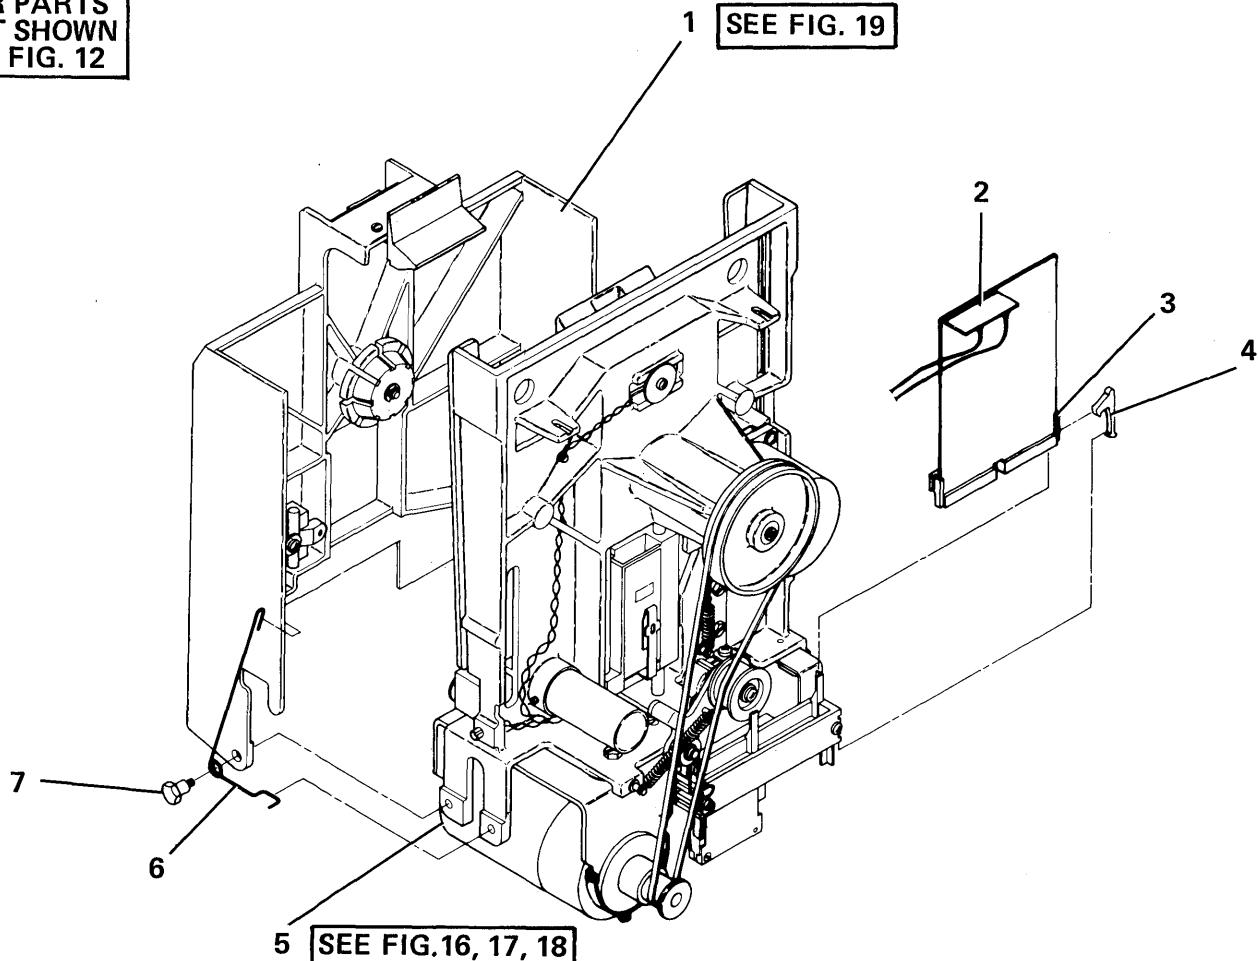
DISK DRIVE ASSEMBLY. SEE LIST 15.
